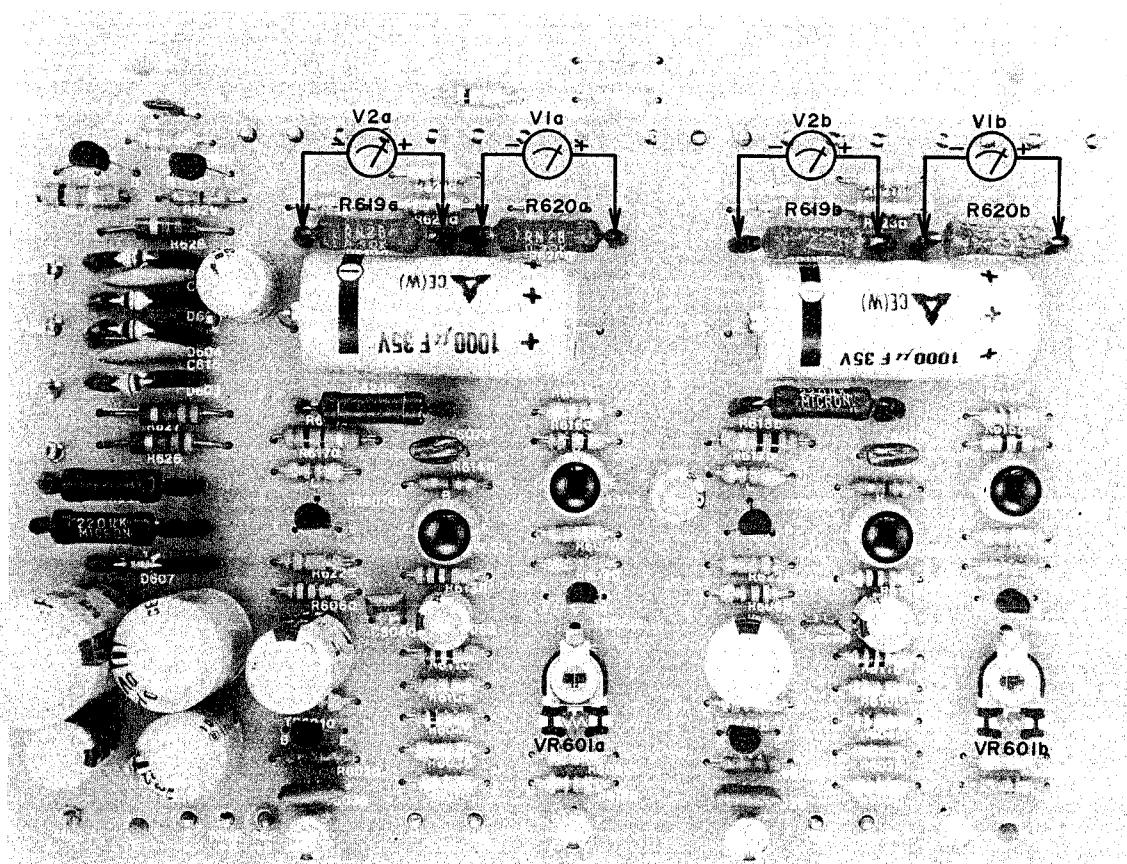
POWER AMP. P.C. BOARD 6023 (Face Side)
